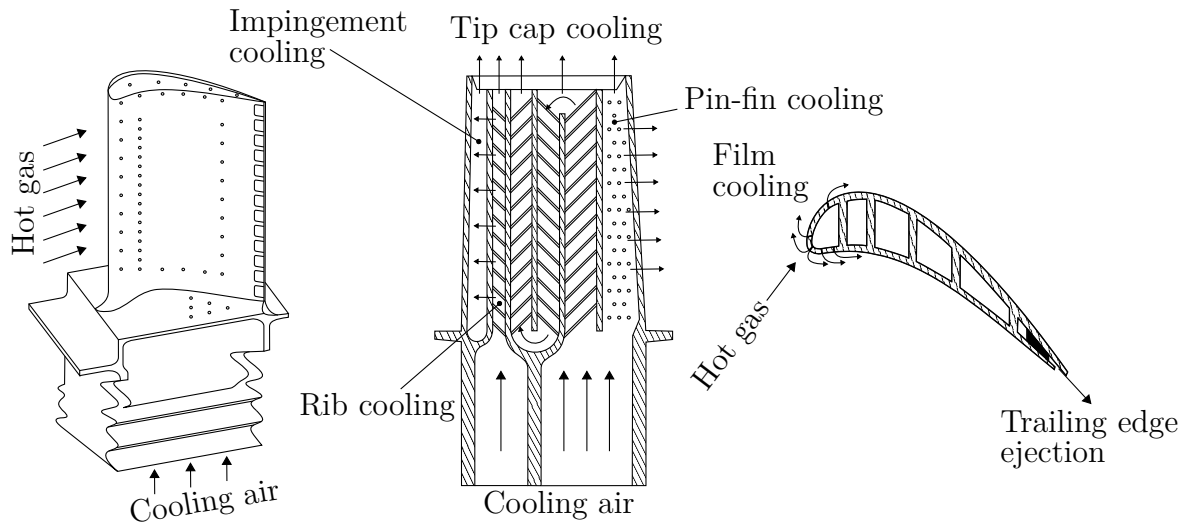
Three-dimensional and cross-sectional view of a turbine blade that is equipped with different cooling mechanisms
